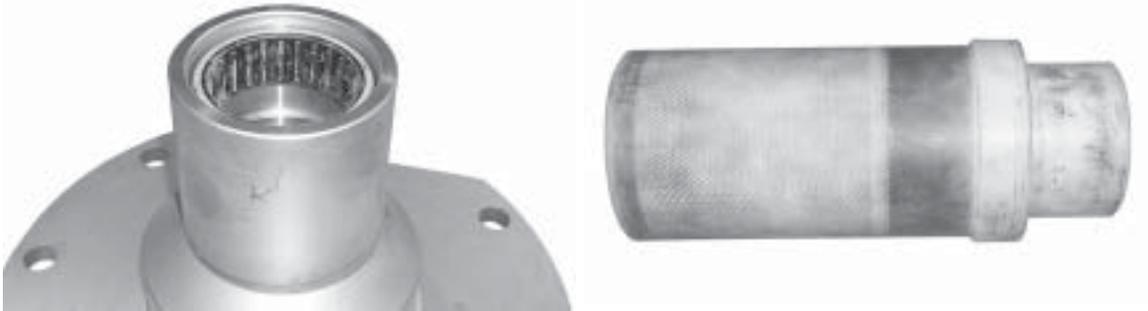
Installing Frozen Forward Socket Bearing into Socket
